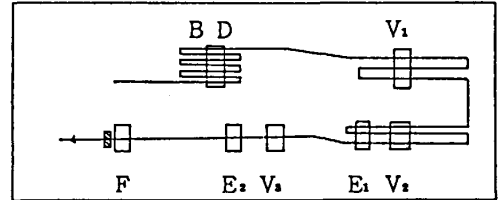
Rail & Shape Mill Layout (Yawata Works)
